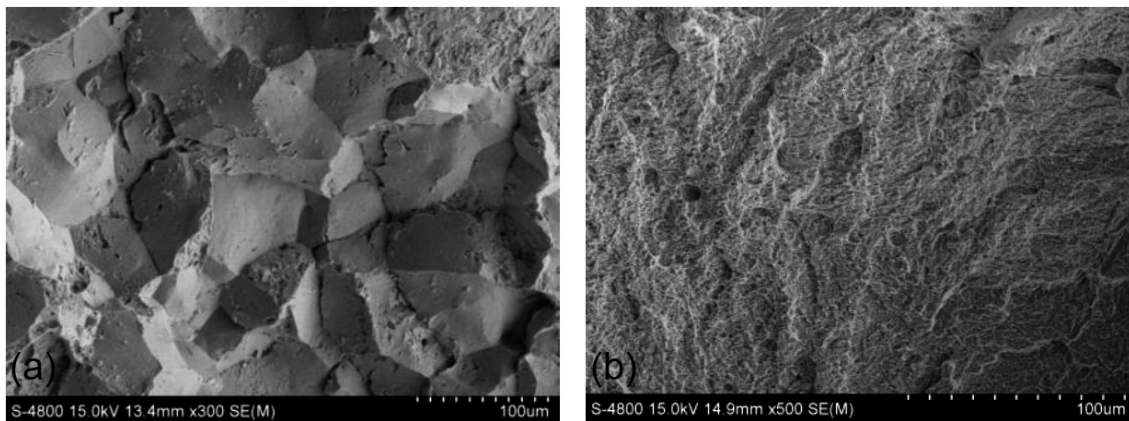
SEM fractographs of grinding balls: a) sample A, b) sample B
